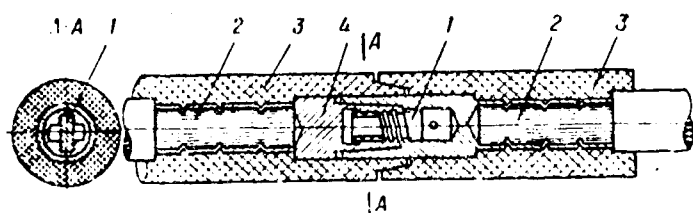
Connecting Sleeve for Welding Cable During Underwater Welding: 1 - plug; 2 - welding cable; 3 - rubber insulation; 4 - socket nut.
